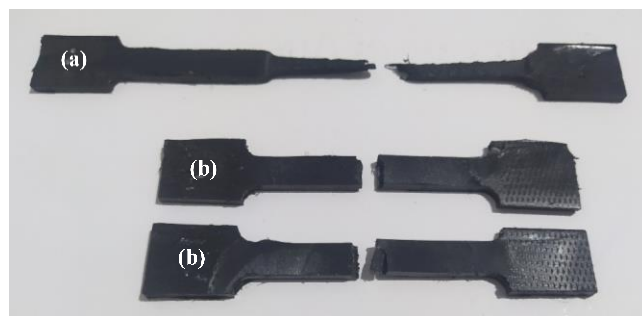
Tensile test specimens: a) non-welded specimen; b) welded specimens.
